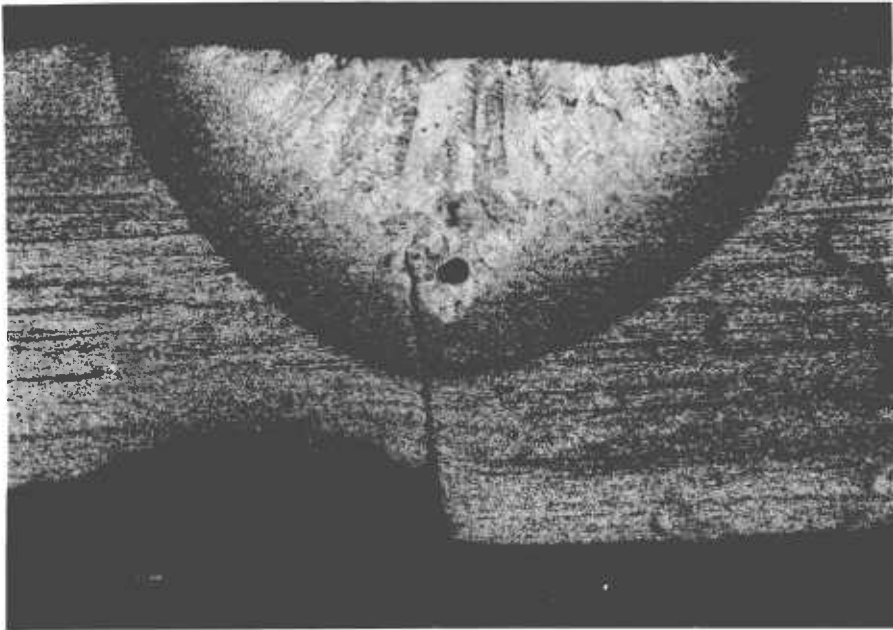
Showing the defect in welding due to traverse speed greater than the optimum range
